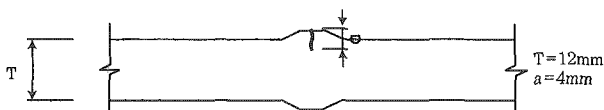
The shape of the surface crack on the butt joint welded web
